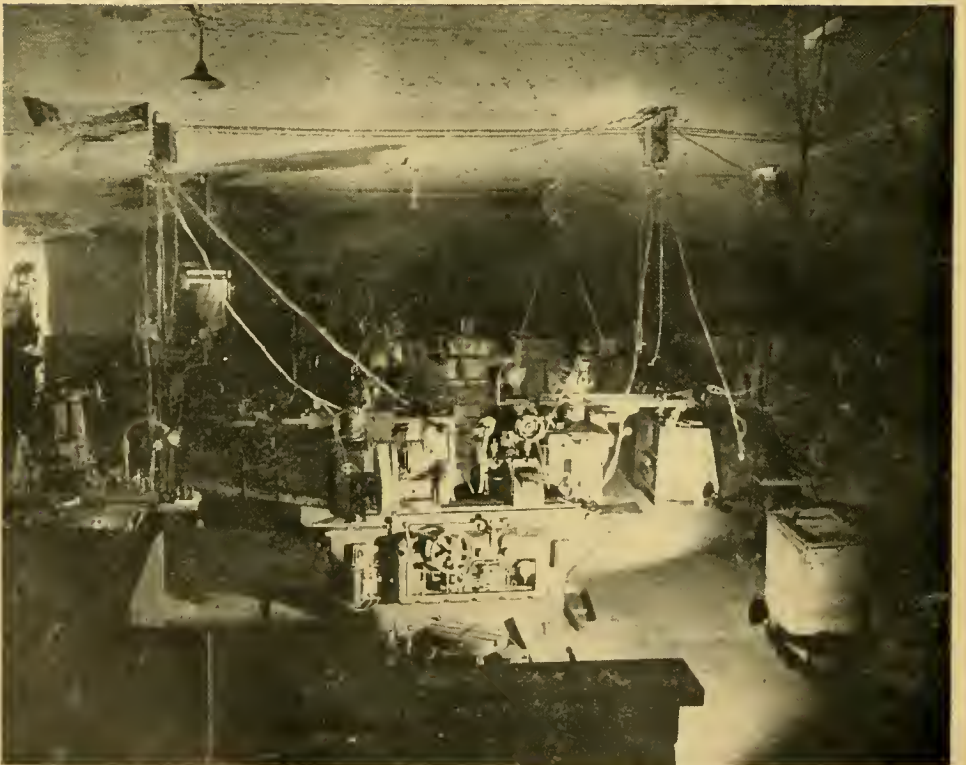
Jig and tool shop, Benten plant at Oya Works.
